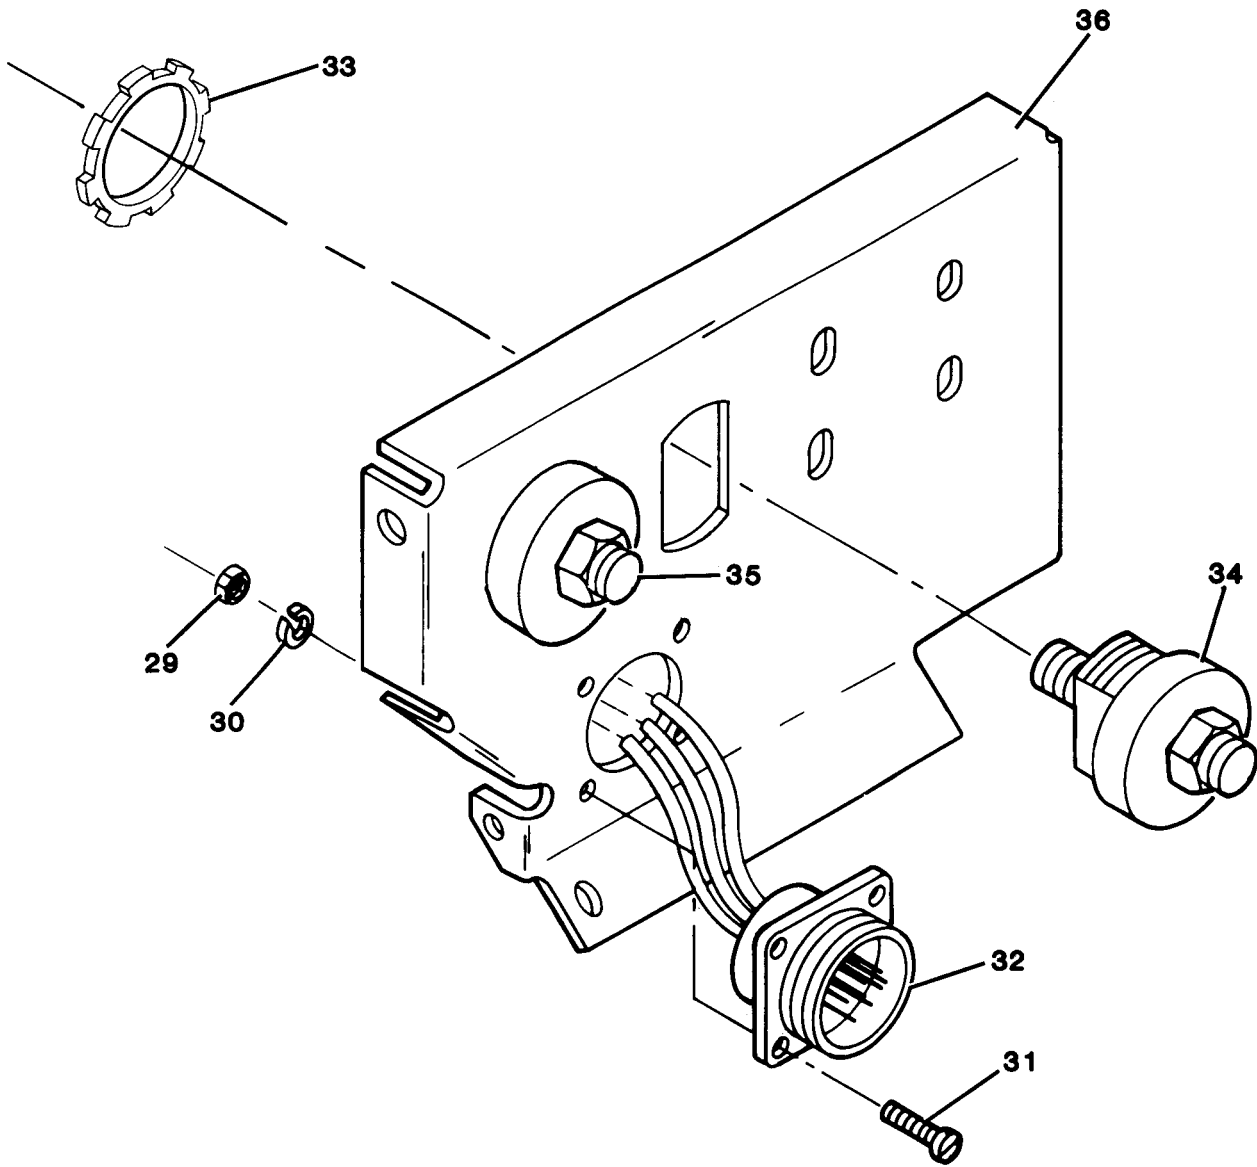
Filter Box Assembly (Sheet 2 of 4)
